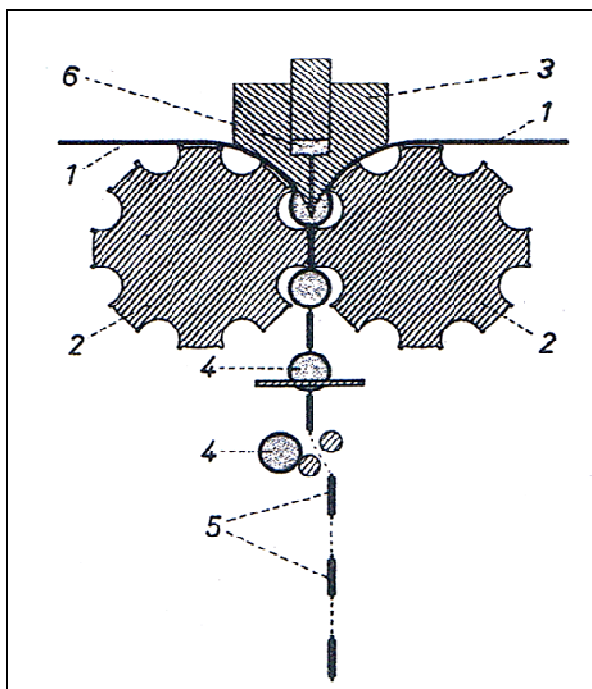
Working principle of SCHERER soft gelatin capsule manufacturing machine.
